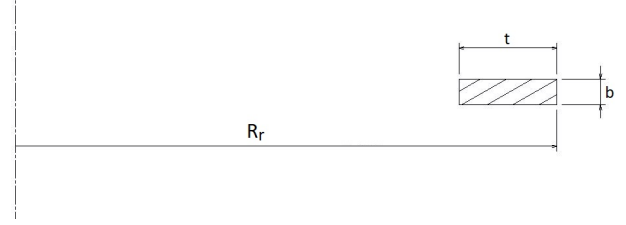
Reaction wheel outer rim section view with general dimensions. Not including spokes.
